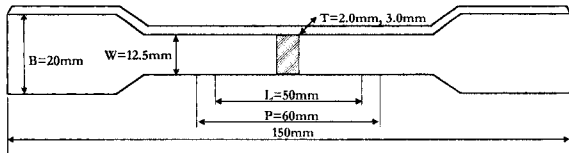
Dimension of transverse weld tensile specimen.
